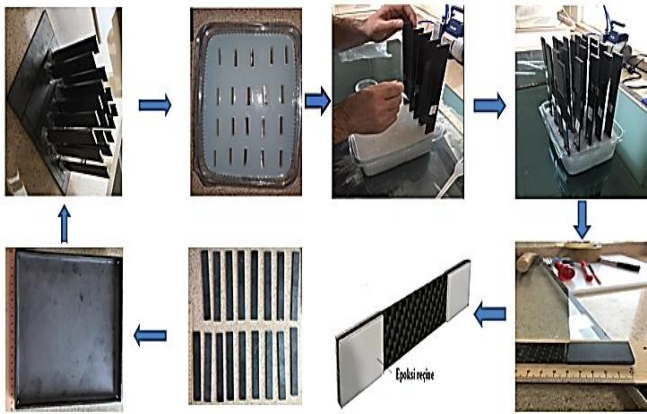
Production stages of the silicone mold for the jaw part of the sample and the stage of coating the jaw parts of the tensile test sample with epoxy
